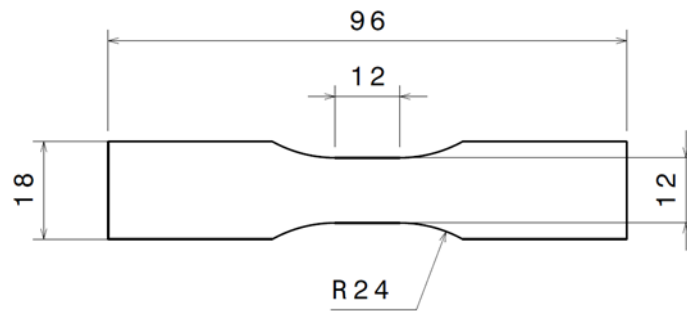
Specimen dimensions of the dynamic tensile test coupons as per ISO 8253.
